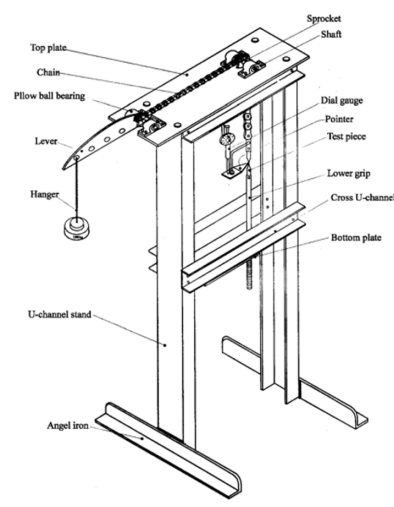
The tensile and creep testing machine designed by Momoh et al.
